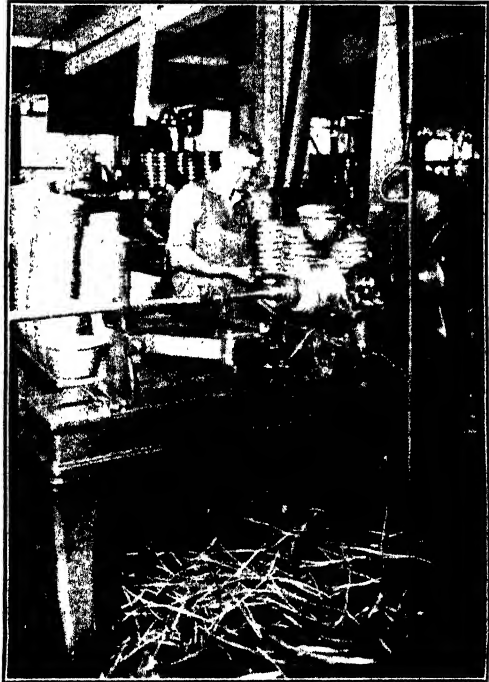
Spinning lathes may be equipped to trim and curl the flanges of round or oval shells and possibly burnish the bodies at one set-up.
